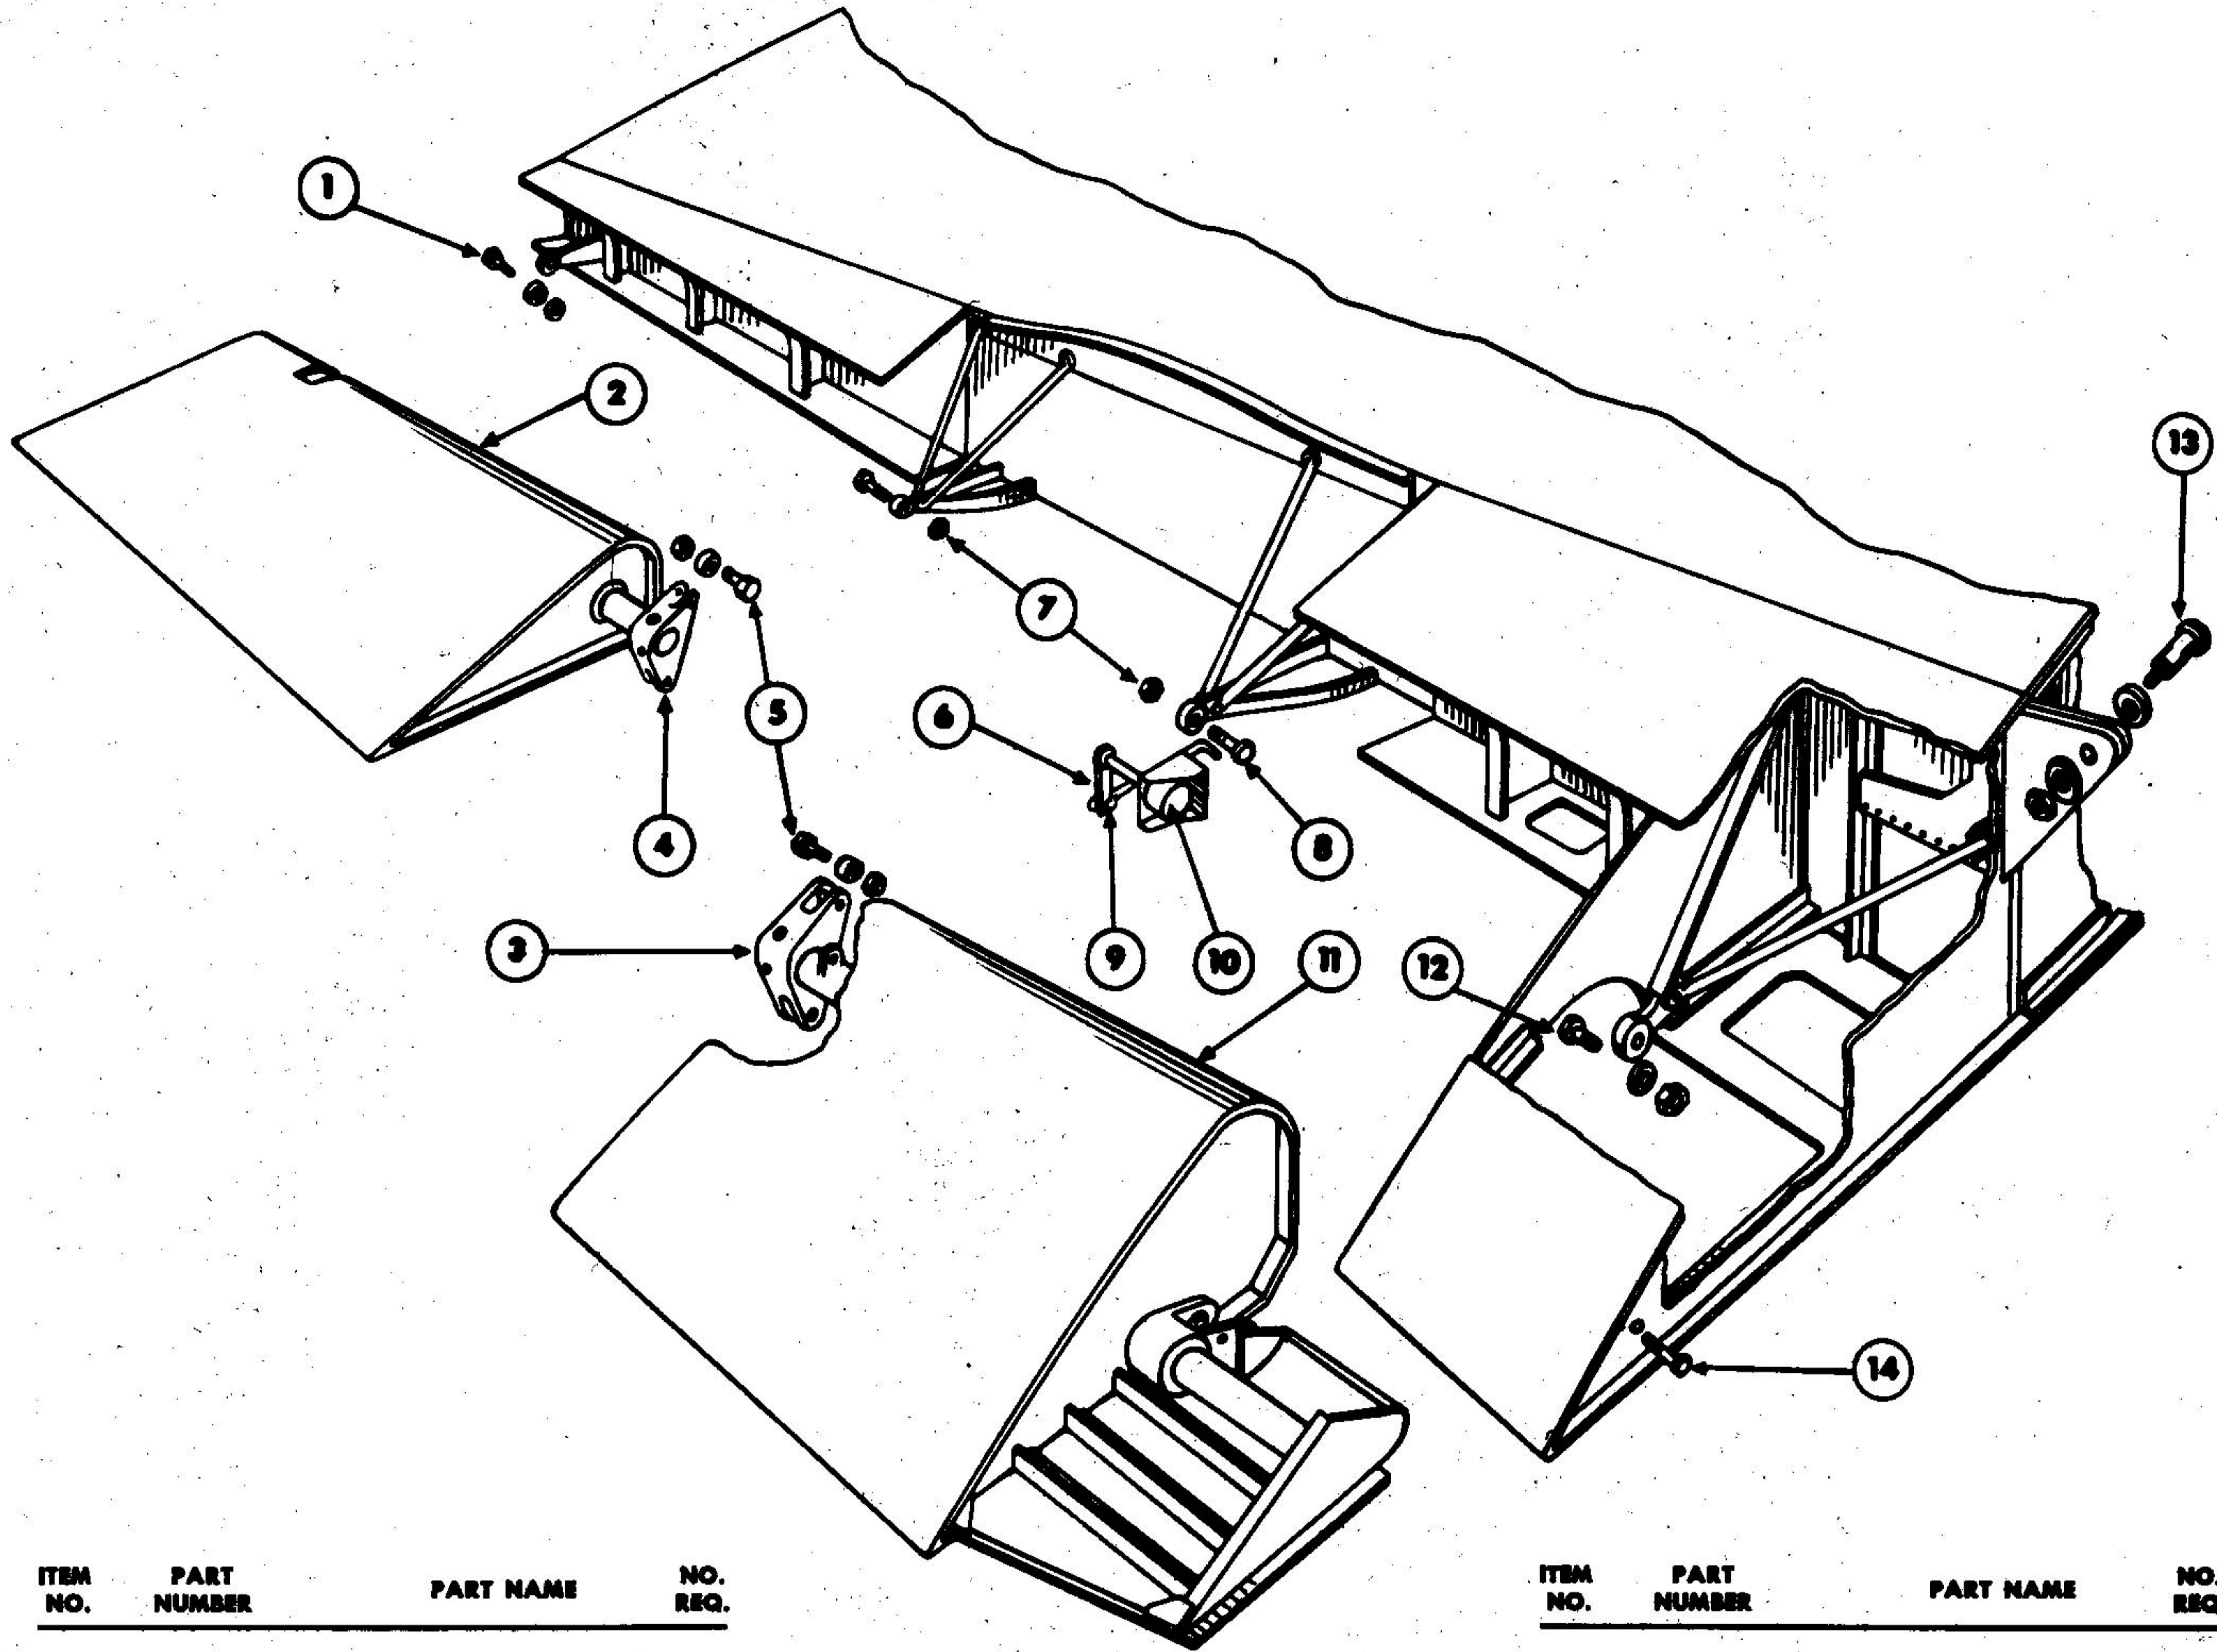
OUTER WING ASSEMBLY AND INSTALLATION
